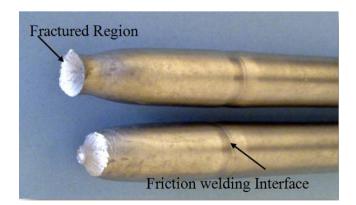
Tested sample with cup and cone shape of ductile fracture of AISI 304.
